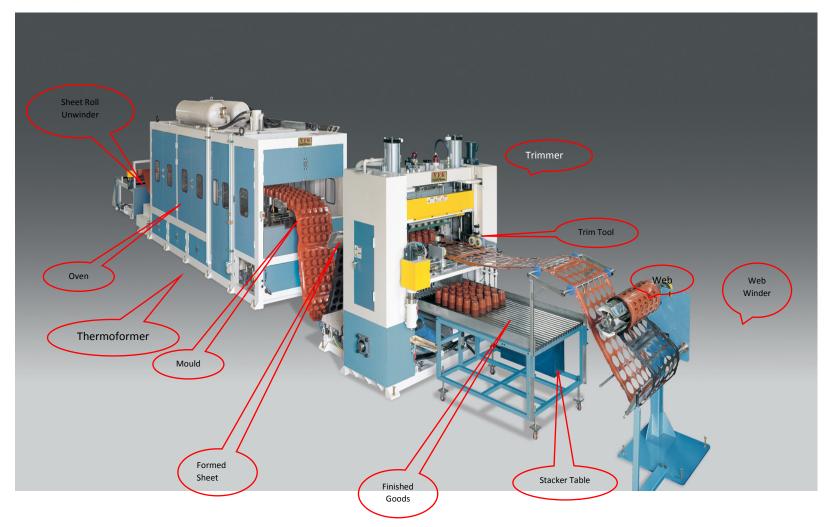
VFK Corporation Pressure forming Machine (Source: VFK Corp)
